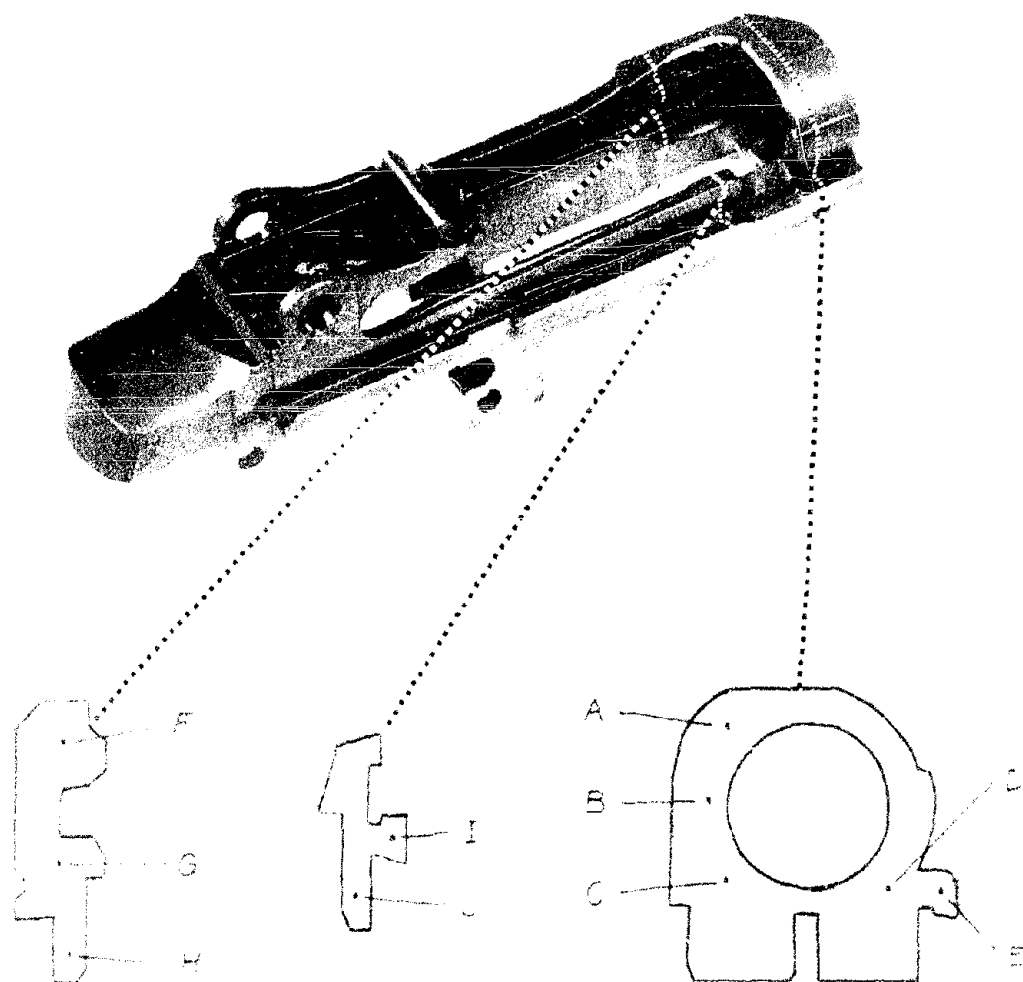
MACROGRAPH SHOWING LOCALLY ANNEALED SECTION
